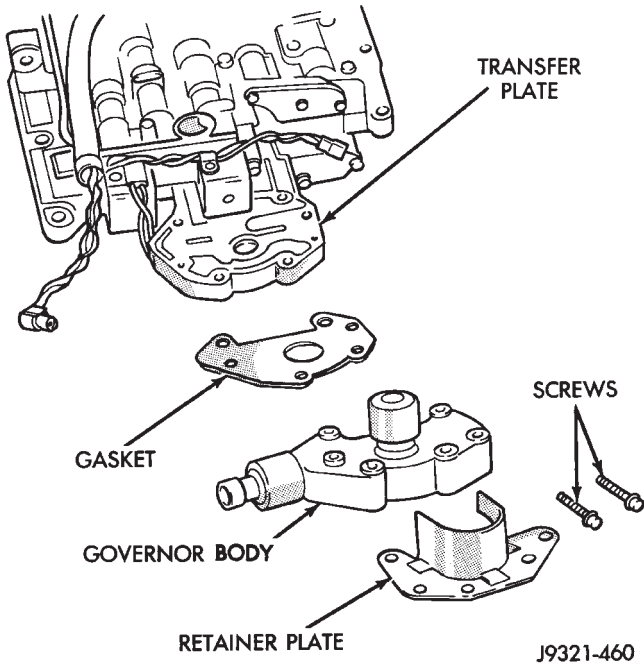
Governor Body, Retainer Plate And Gasket Removal
